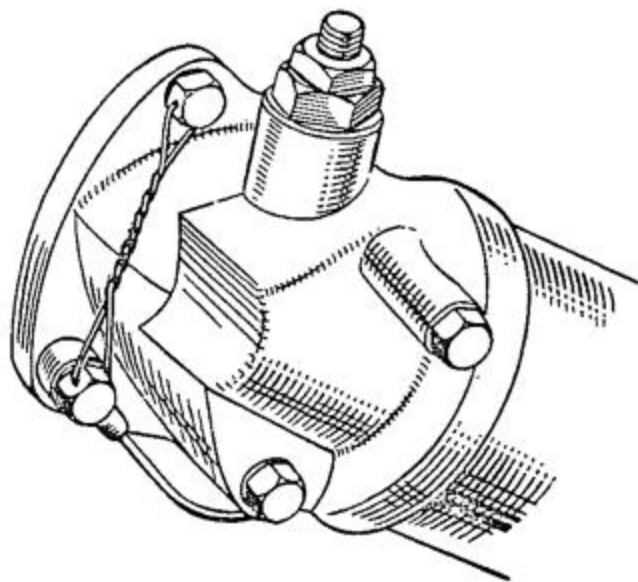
Showing correct method of wiring filter bracket holding bolts. (Engines up to V179369 and TDC1567.)
